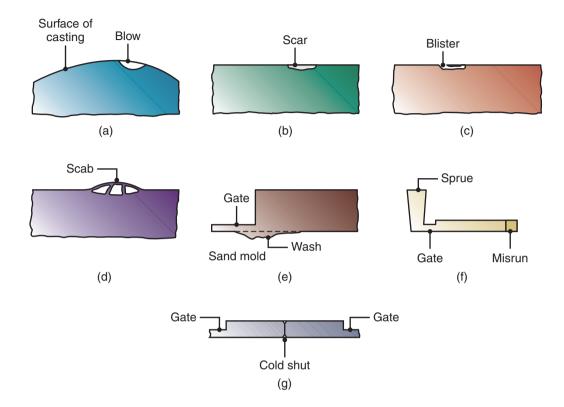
Examples of common defects in castings. These defects can be minimized or eliminated by proper design and preparation of molds and control of pouring procedures. *Source:* After J. Datsko.
